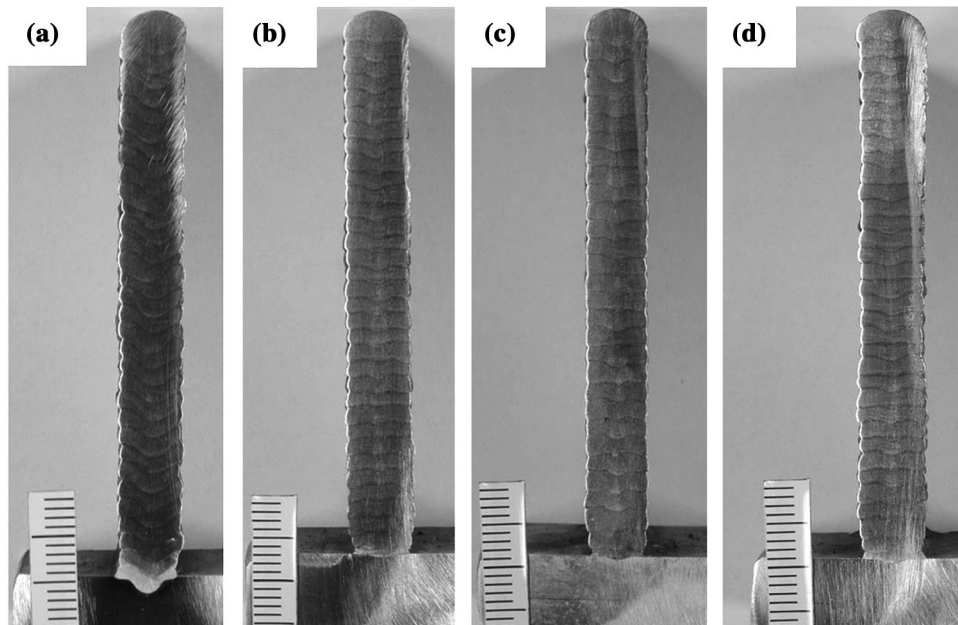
Macrostructure of (a) wall 1, (b) wall 2, (c) wall 3, and (d) wall 4 produced by WAAM.
